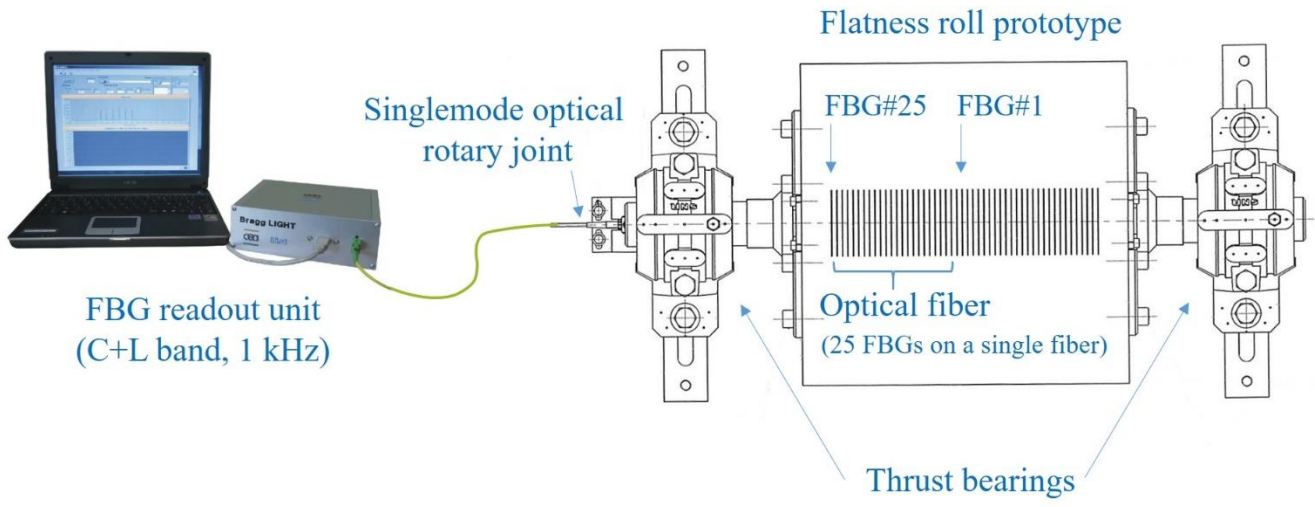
Design sketch of the prototype roll equipped with FBG strain gauges. Optical signals are extracted from the roll using a singlemode optical rotating joint (SL#1 configuration is shown).
